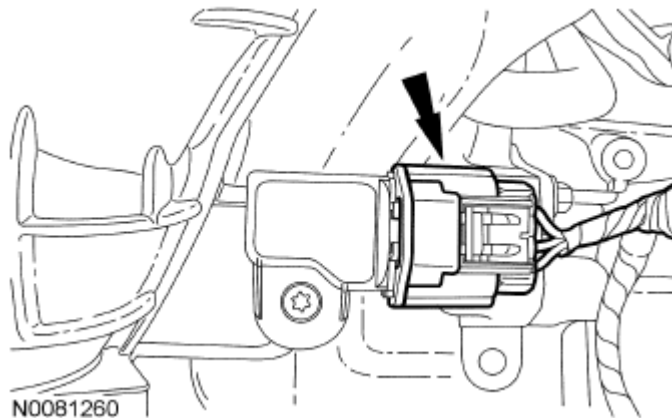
Locating Manifold Absolute Pressure Sensor Electrical Connector
